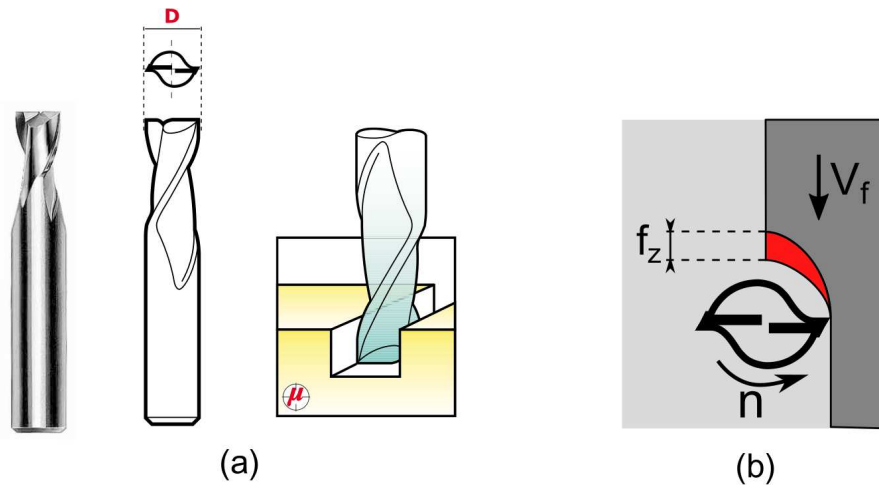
(a) Picture and drawing of a 3 mm end mill tool with 2 teeth. The drawing on the right shows the operation of the tool and the section of the groove created. Adapted from Magafor documentation. (b) Sketch showing the chip in red. It is defined by the area cut by the incoming tooth as the part is fed against the tool, from top to bottom (V_f). The light gray area is the region already machined, while the darker gray represents the region to be machined, thicker.
